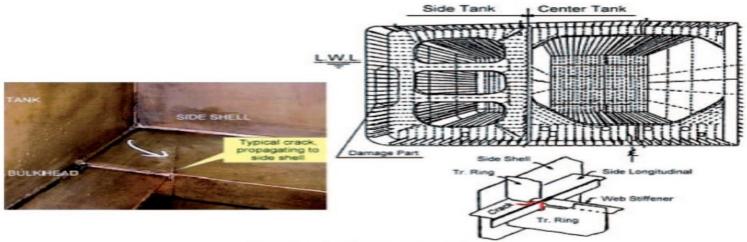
Example of fatigue cracks in tankers [3]
